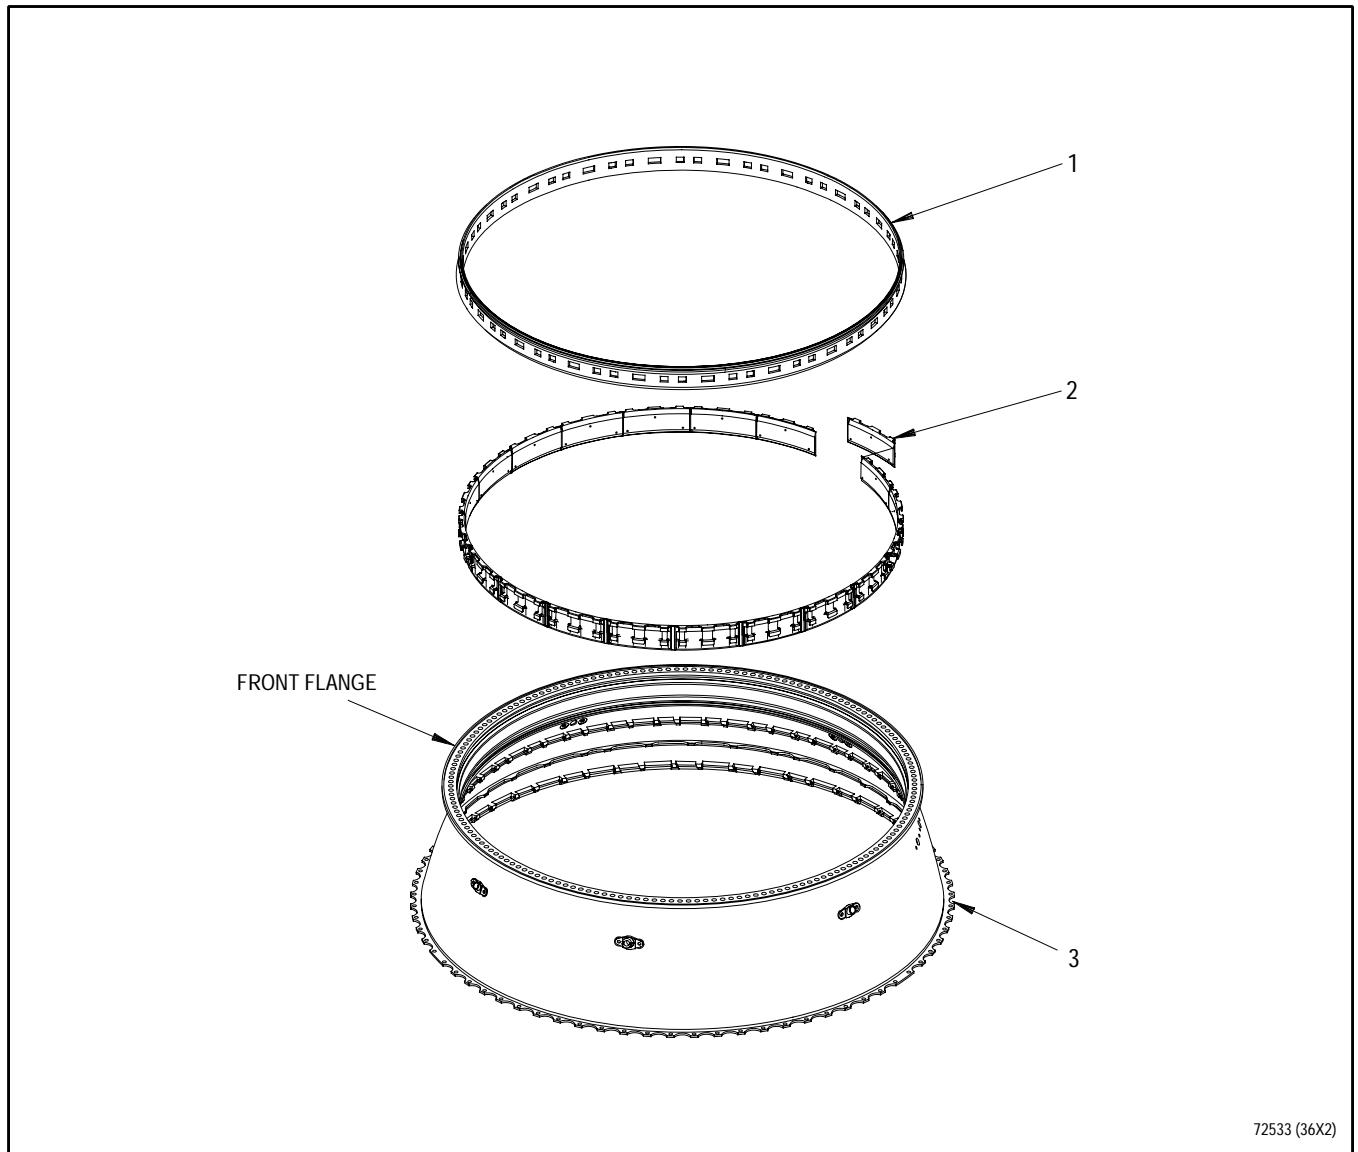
Front Compressor Drive Turbine Rotor and Stator - Disassembly (Sheet 12 of 12)
